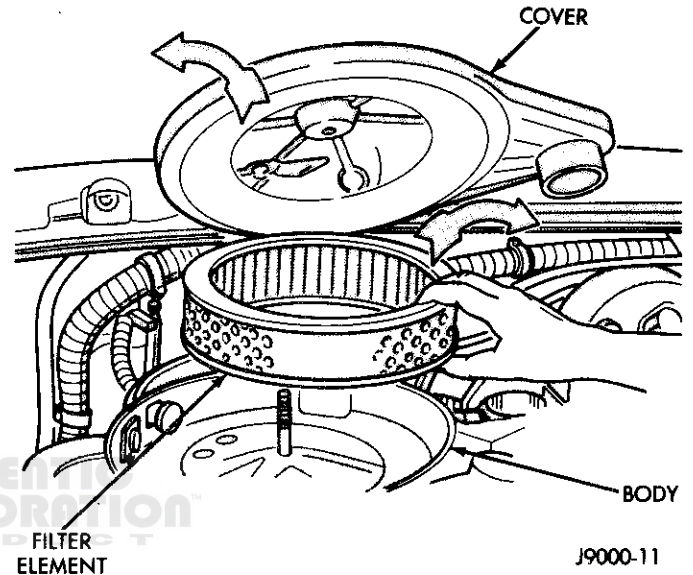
Air Cleaner—4.2L and 5.9L Engines
